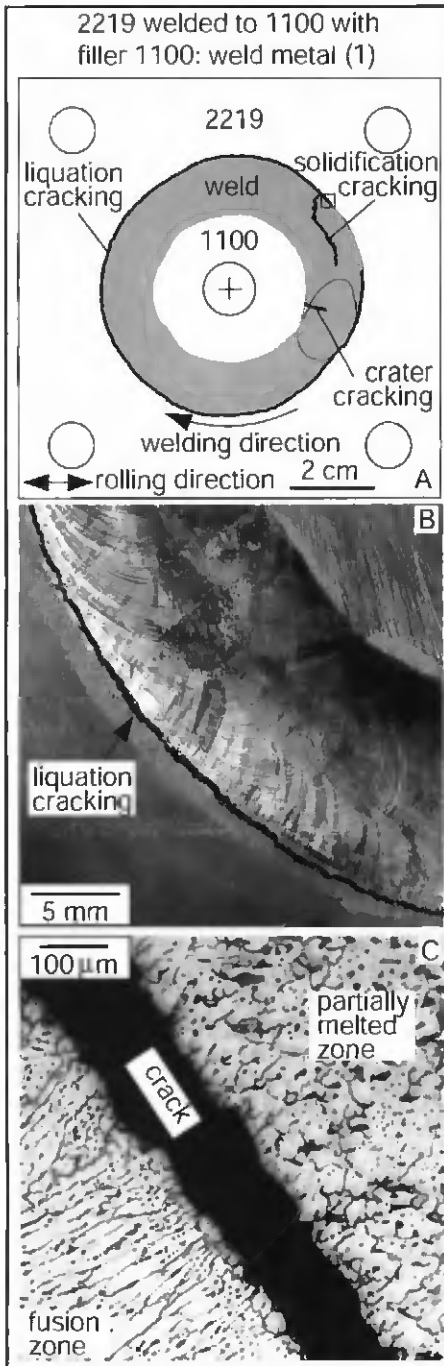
Weld made between Alloy 2219 (outer piece) and Alloy 1100 (patch of 57.2 mm diameter) with filler metal 1100. A — Overview; B — macrograph; C — micrograph of area in square in A.
